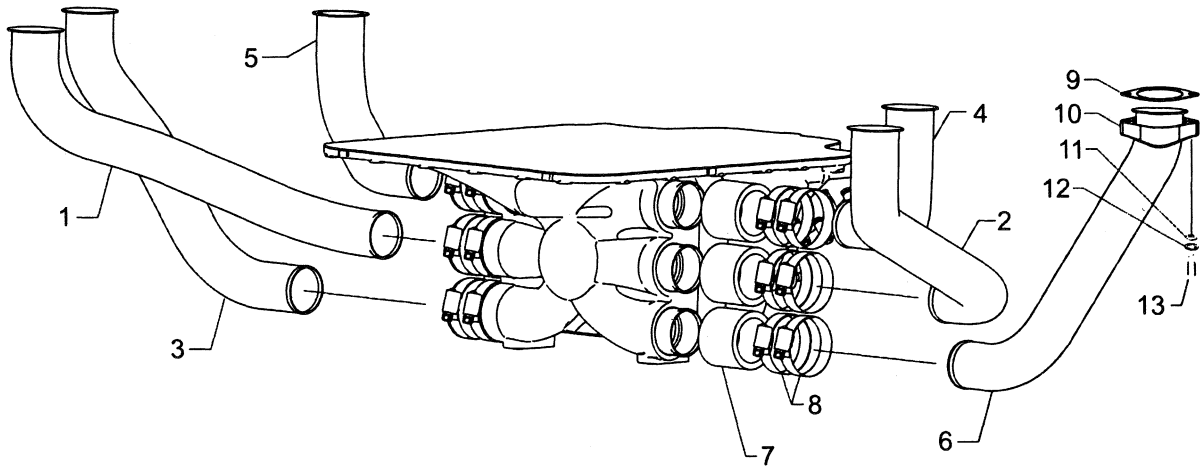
INTAKE PIPES AND ATTACHING PARTS
